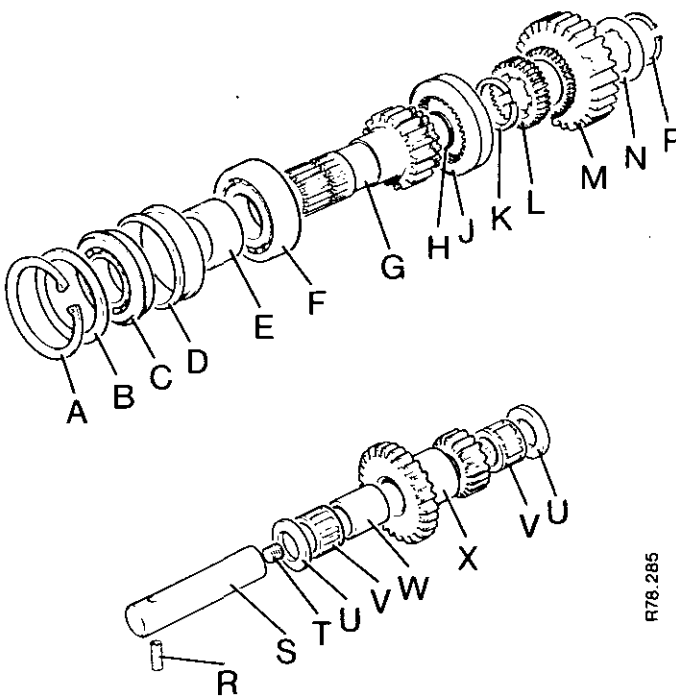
SLOW/NORMAL GEARS 1410 TRACTOR
